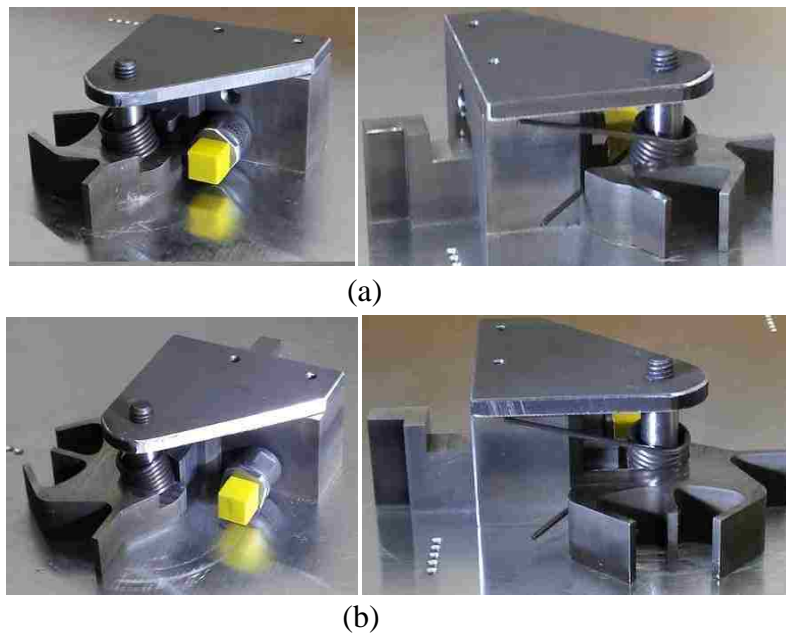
Photographs of cutter deployment apparatus. (a) 3-bladed cutter assembly. (b) 4-bladed cutter assembly.
